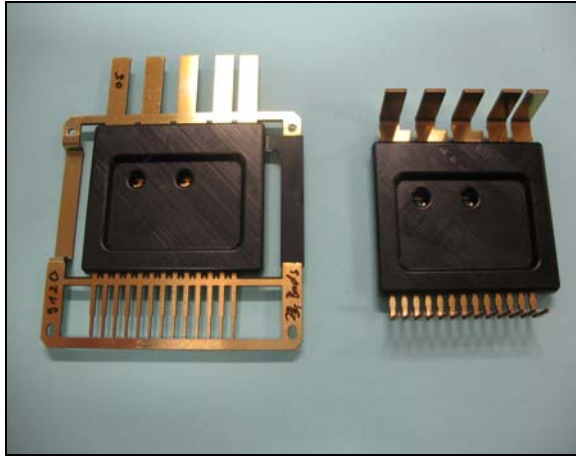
Leadframe layout, dam bar and handling connector points
